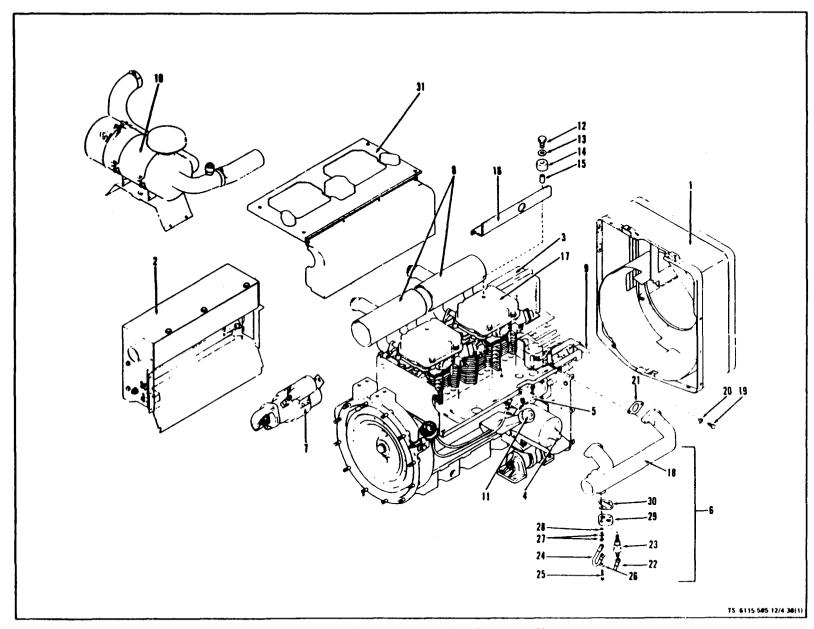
Engine Assembly (Sheet 1 of 2)
